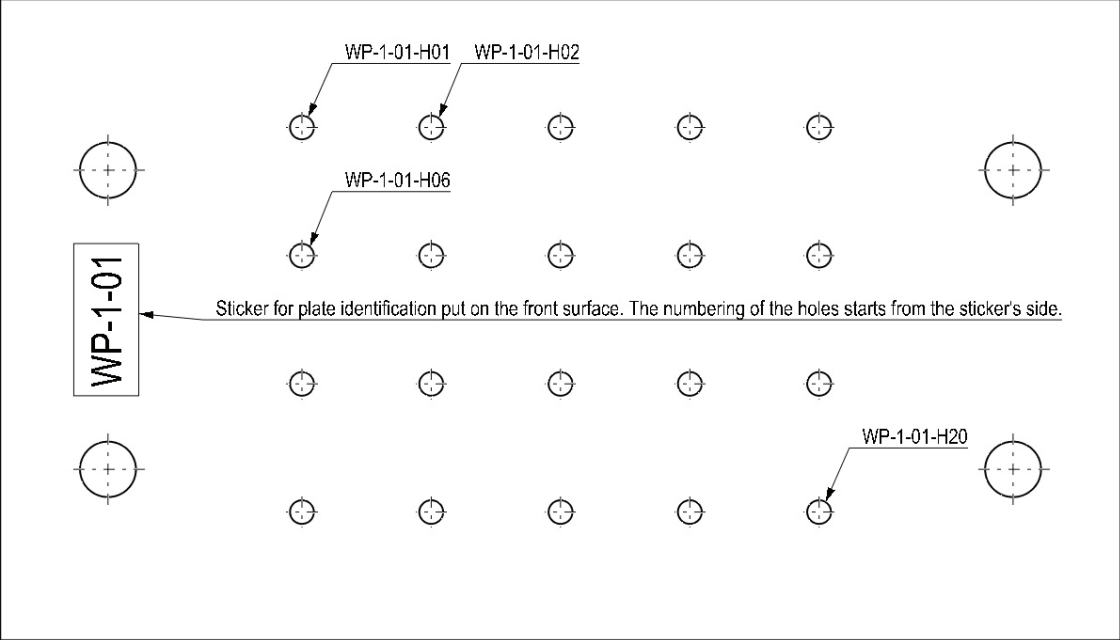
Hole configuration on work-piece and hole numbering system
